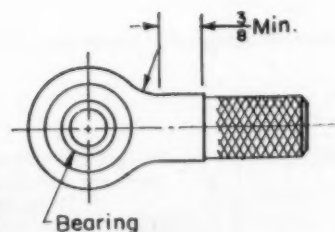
Above—Knurled rod end bearing. Clearance is necessary for swaging operation
